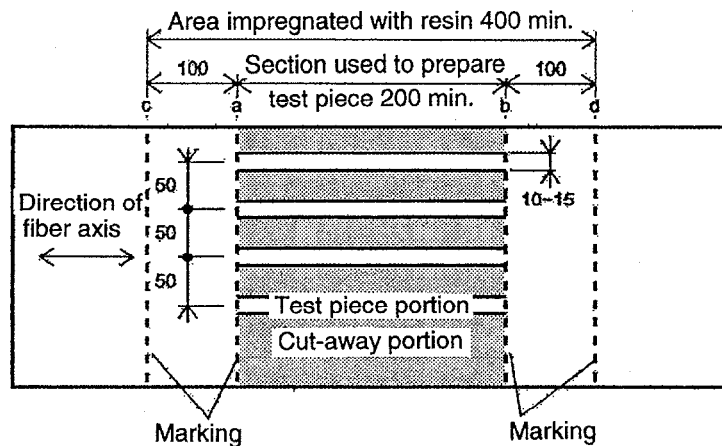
Dimensions of plate used to prepare Type B test specimens (unit: mm)
